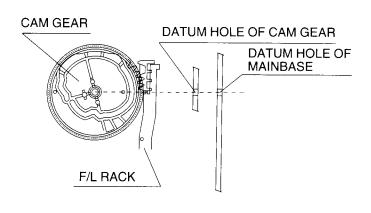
ASSEMBLY OF THE CAM GEAR & F/L RACK
